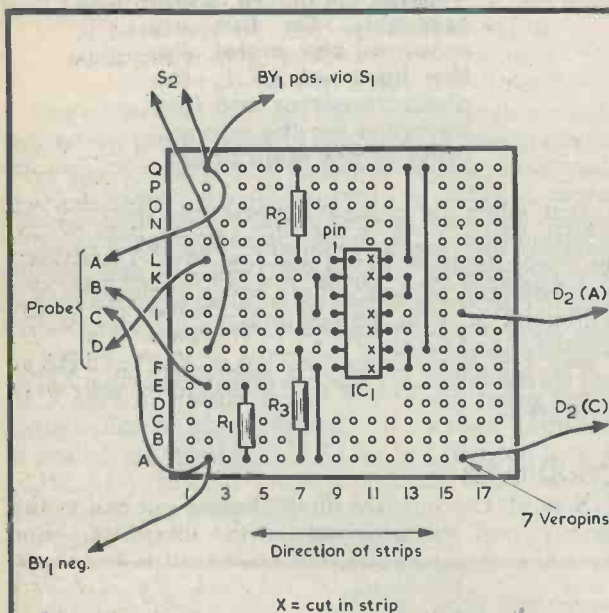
The main circuit board. In company with the probe assembly, this employs 0.1in. Veroboard.
